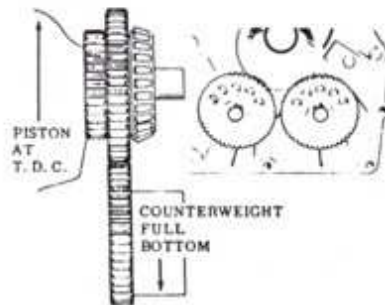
To time balancer gears on Models HH80, HH100 and HH120, remove pipe plugs and insert timing tools #670239 through crankcase cover and into timing slots in balancer gears. Refer also to Fig. T53.
